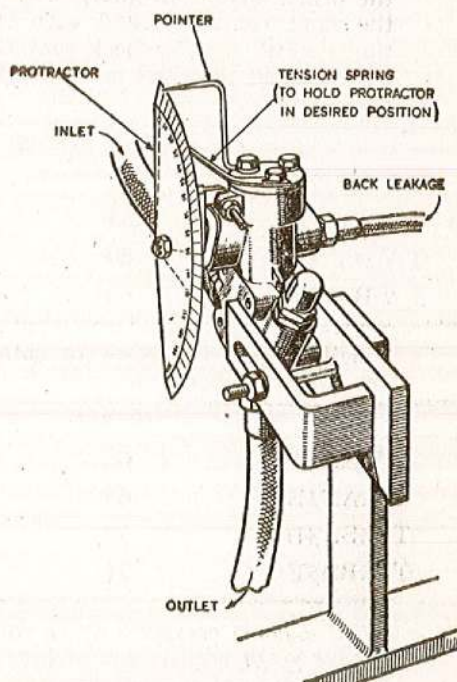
View showing protractor and pointer mounted on throttle valve when mounted on test rig
